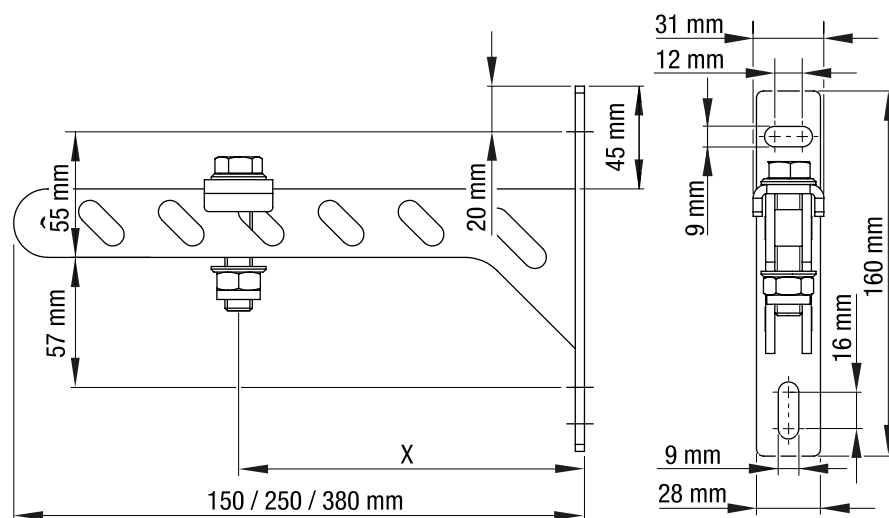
Wall mount bracket for suspensions – Installation dimensions
